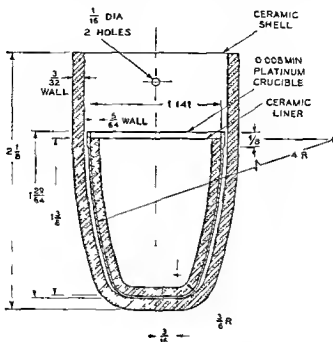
Crucible Assembly (All Dimensions in inches)
